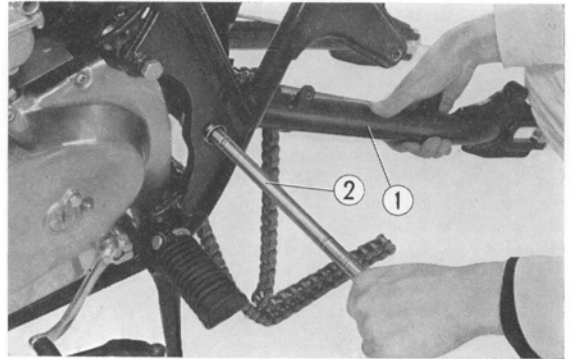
① Rear fork ② Rear fork pivot shaft
